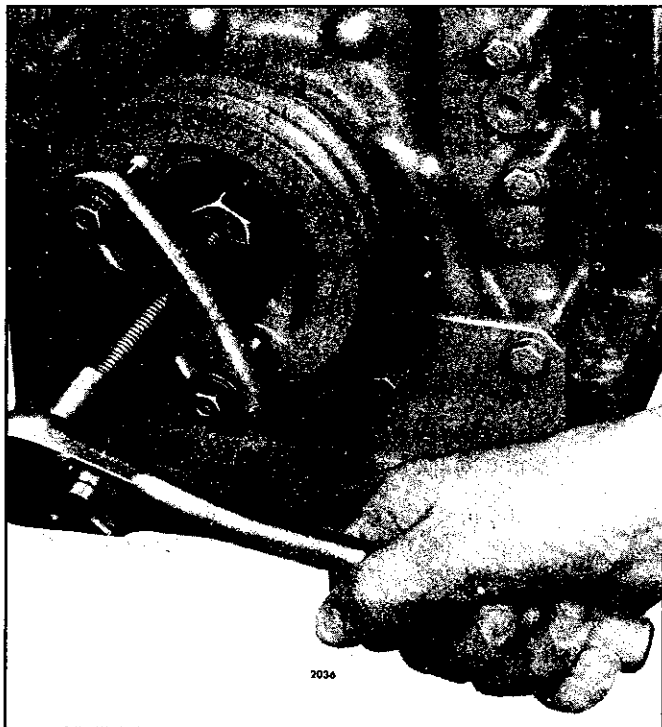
Removing Crankshaft Pulley Using Puller J 24420-A
